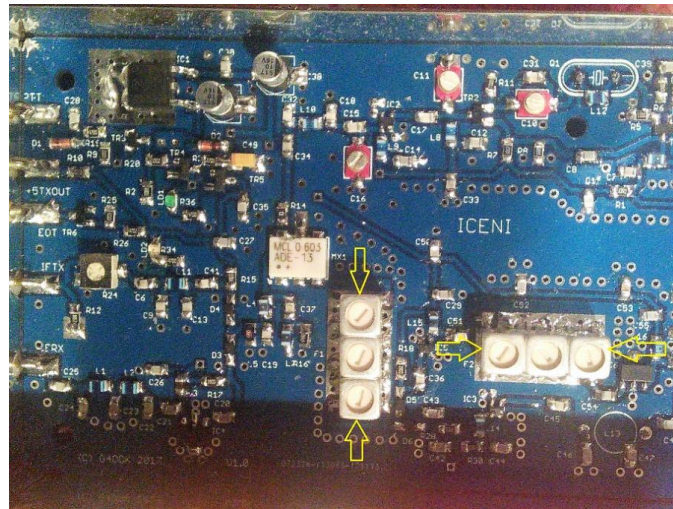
Solder the two helical filters along the edges shown by the arrows. The amount of bare board showing, to be solder to, is very limited on this board. Use a small pointed soldering iron and ensure a good solder fillet along the length of the filter. Photo G4FRE.
